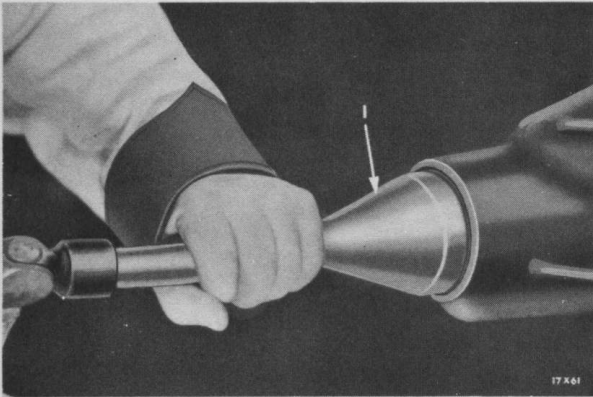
Installing Drive Pinion Bearing Oil Seal
